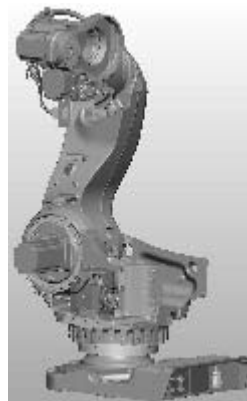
Cooling fan for axis 1 motor and axis 3 motor.
